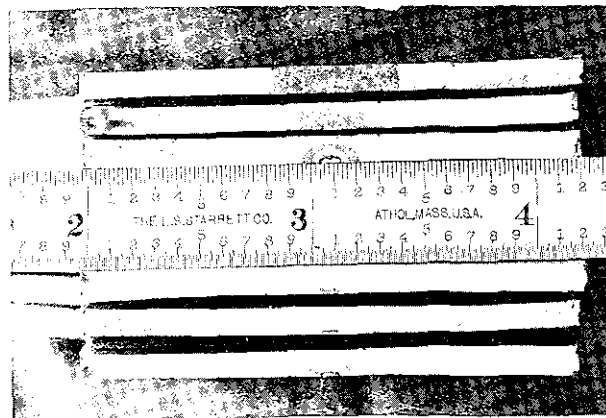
Fracture Faces $1/8"$ 300M Surface-Crack (Top) and Through-Crack (Bottom) Specimens, F_{tu} 290 KSI
